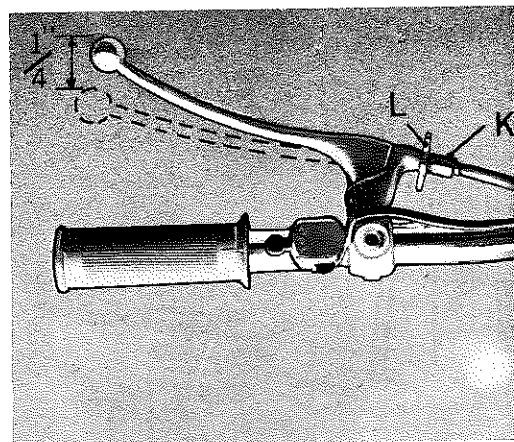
Permissible lever freeplay shown by dotted line. Note adjuster screw (K) and lock nut (L) on handlebar lever.
